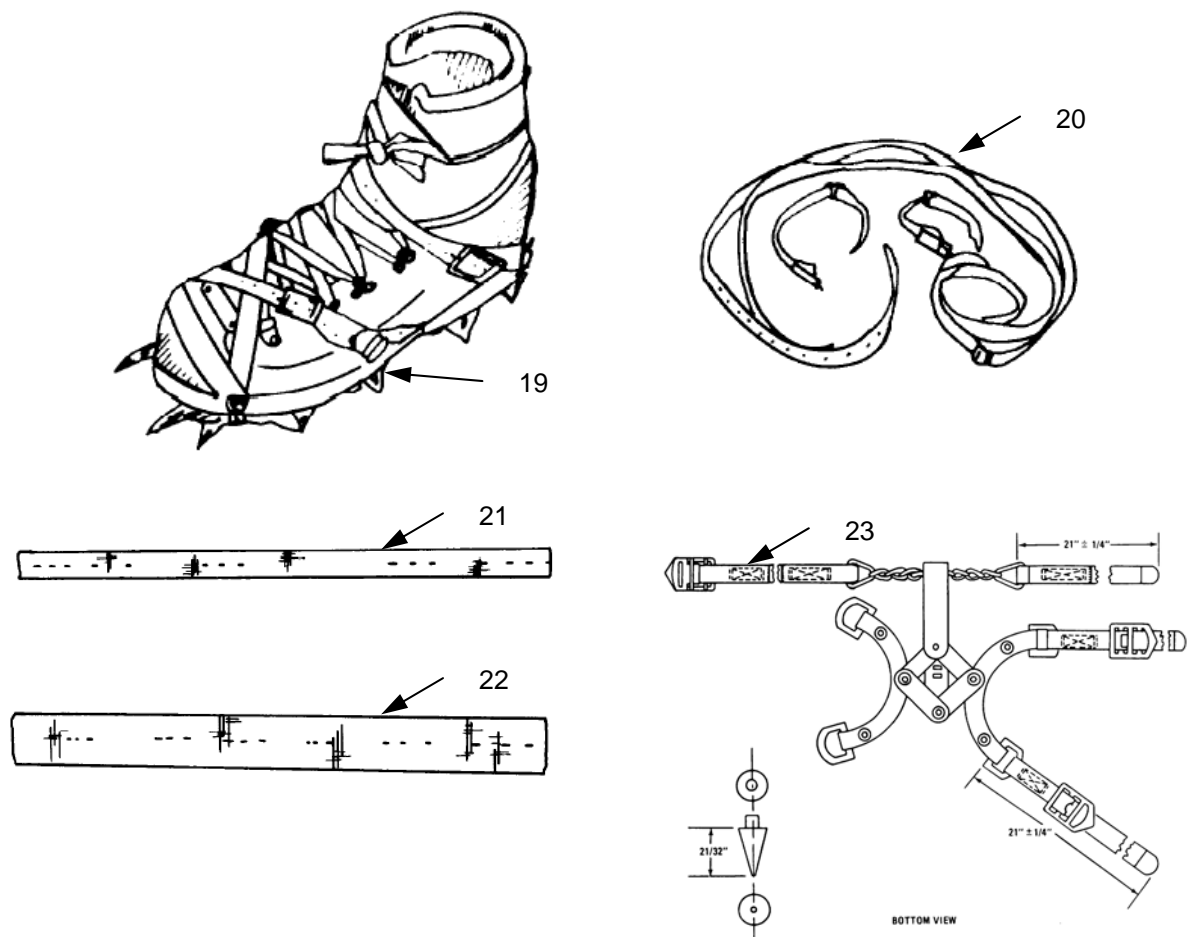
Mountaineering Gear (Sheet 4 of 4).
